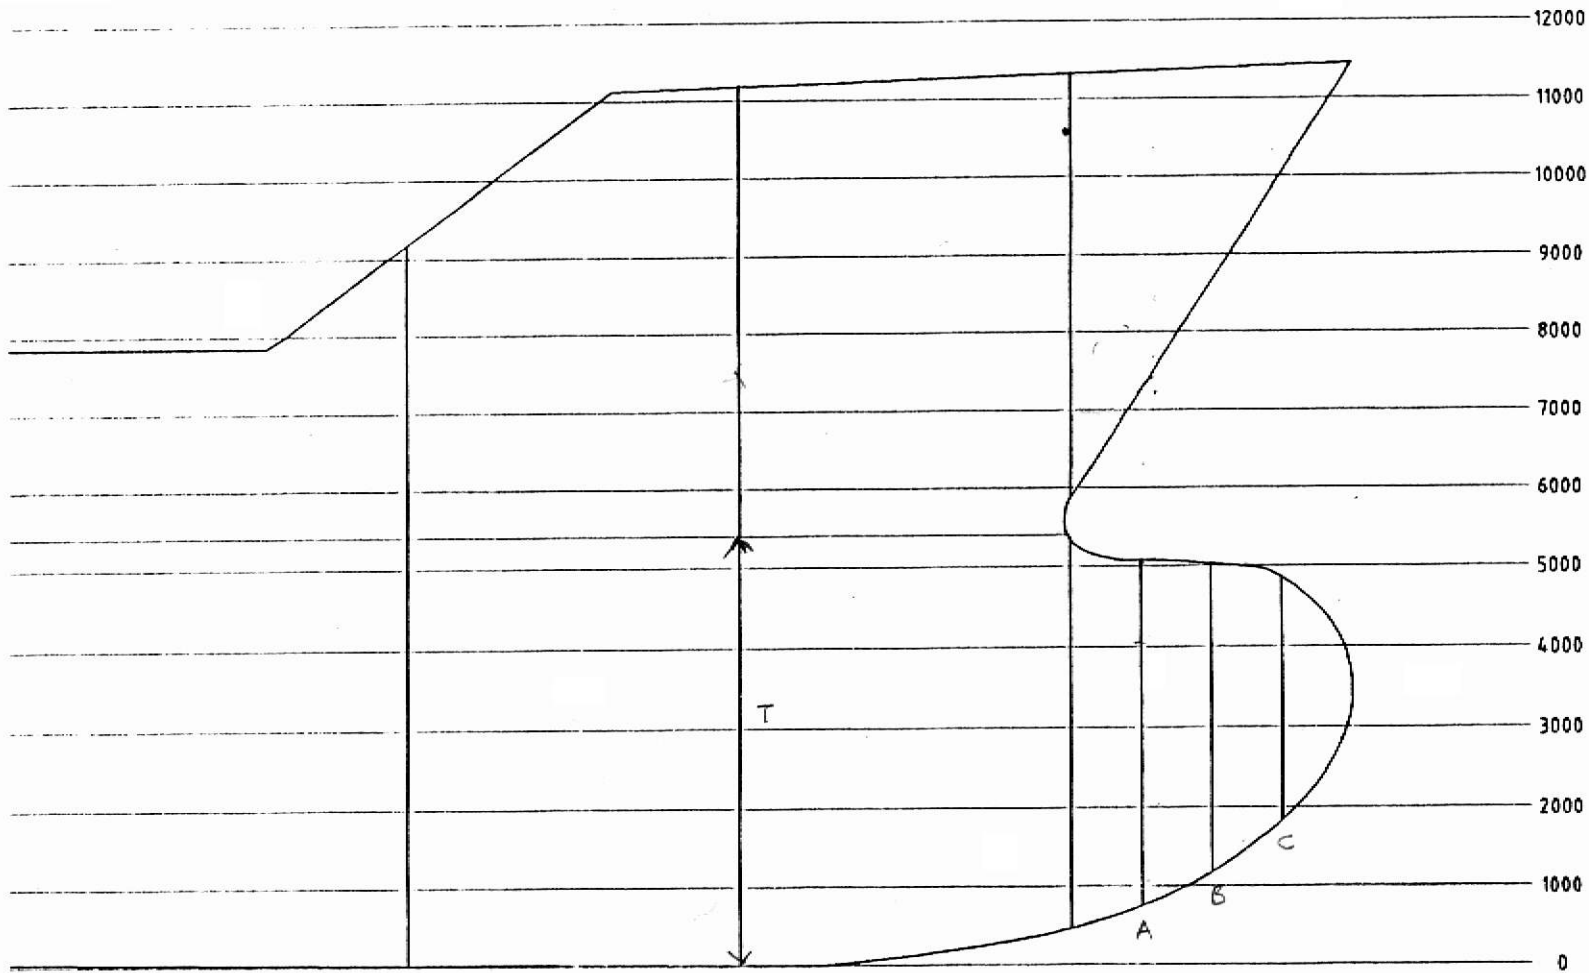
Profile Plan. (XZ plane intersection (FORE) - Scale : 1/100)
